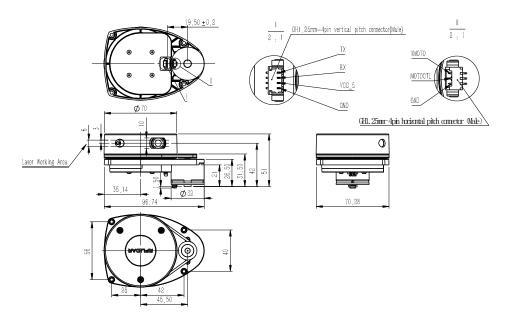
The Mechanical Dimensions of RPLIDAR A1
